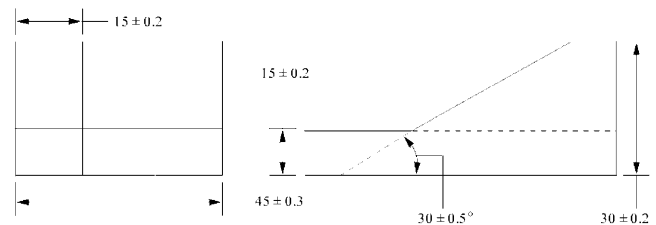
Dimensional and angular tolerance specifications of a part.
